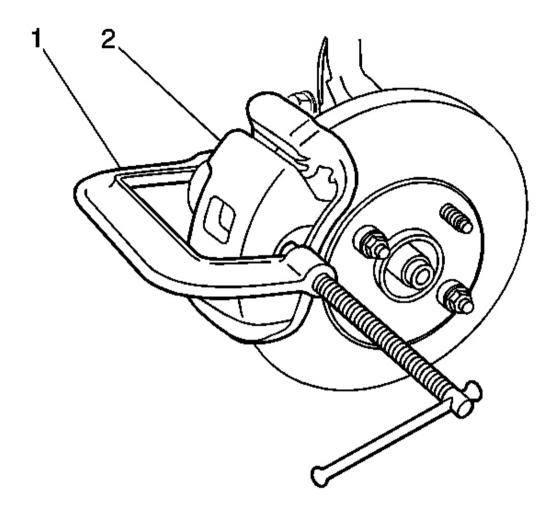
Removing/Installing C-clamp From Caliper Courtesy of GENERAL MOTORS CORP.
